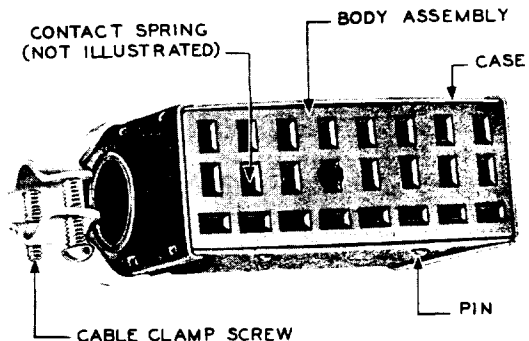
Howard B. Jones Socket Arranged for 24 Sets of Contact Springs
